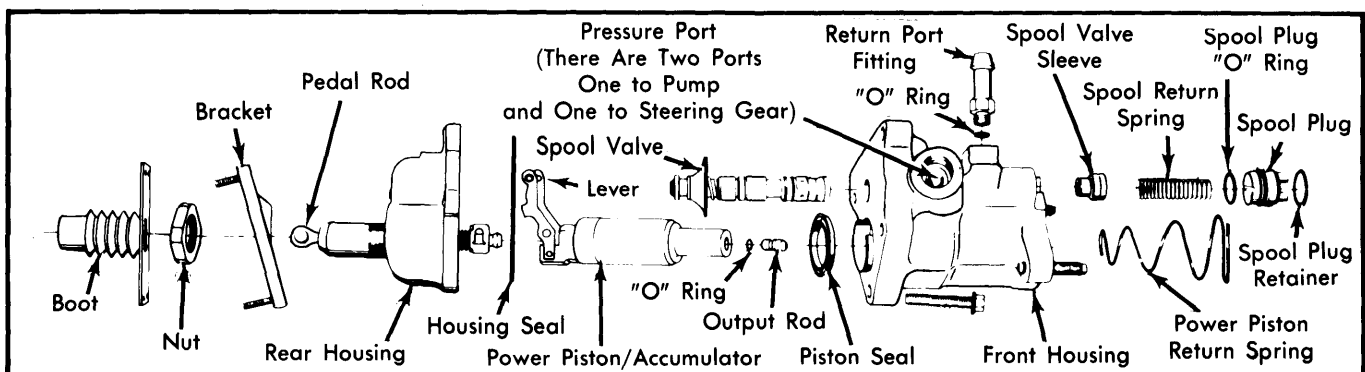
Exploded View of Hydro-Boost II (Chevrolet Shown)
